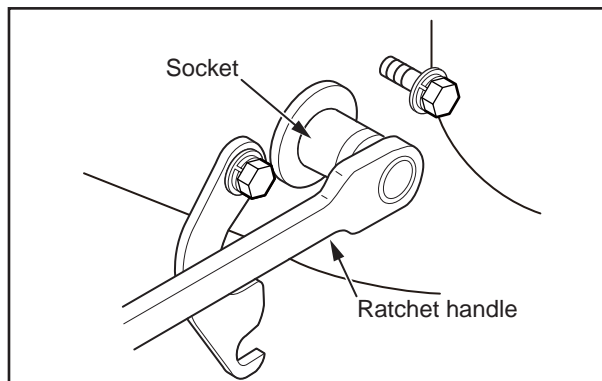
Manual Turning Gear Position (When Turning Shaft)
